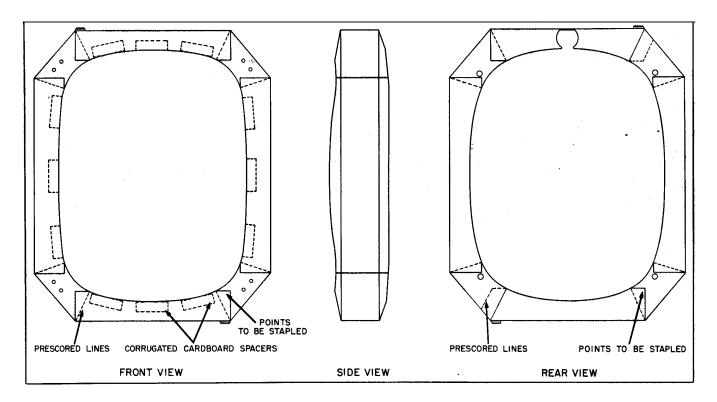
Details of Foil-Covered Cardboard Pickup Band Shield
